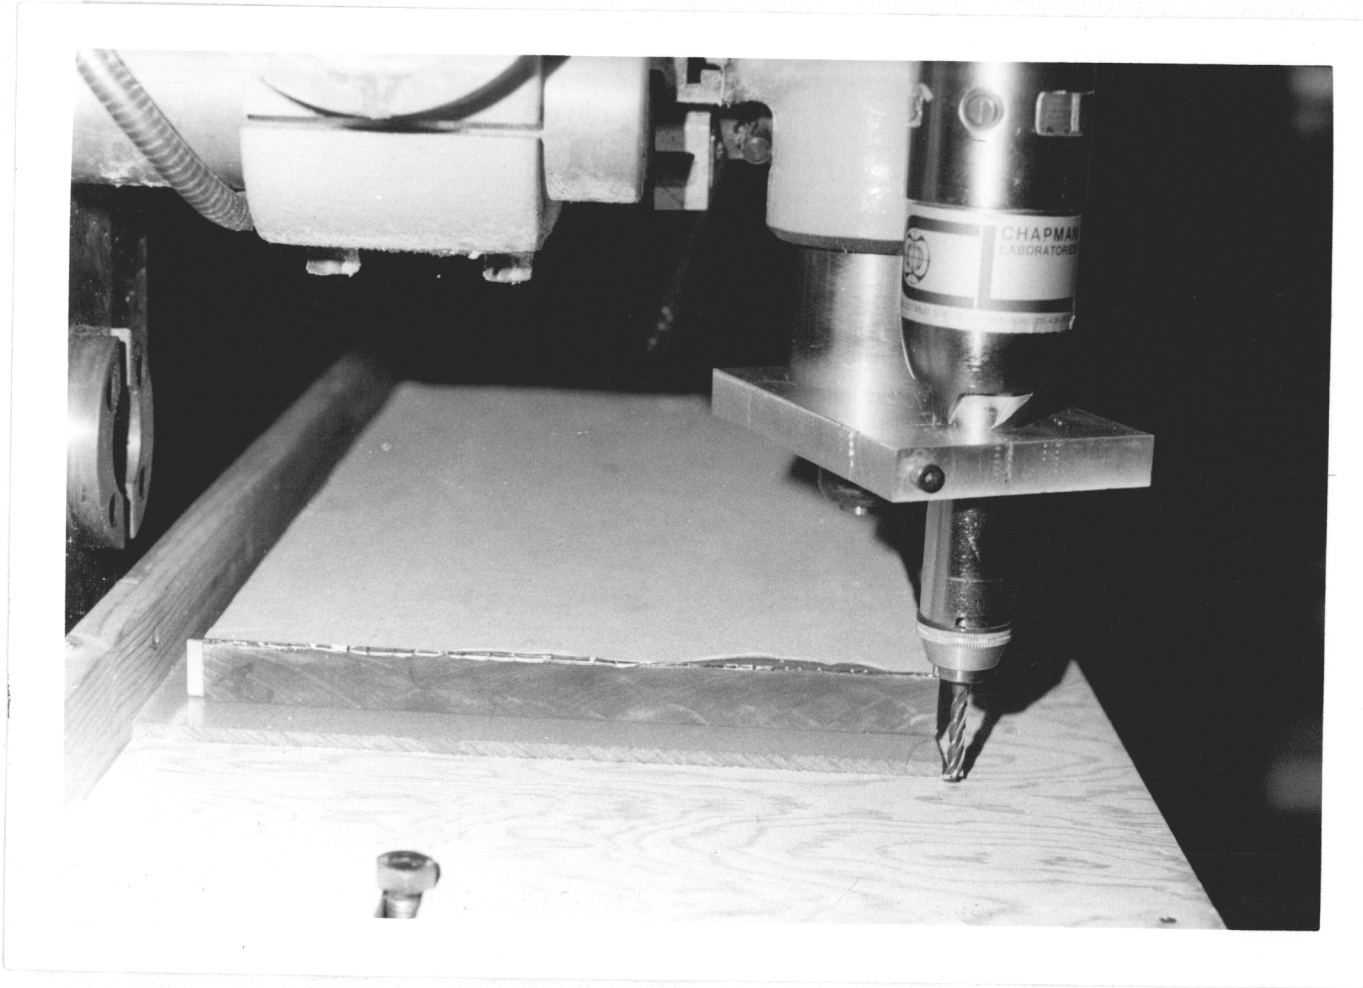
End View of Initial Machining Procedure, Edge Milled.
